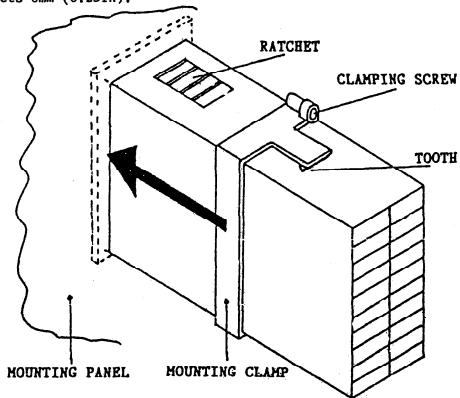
ATTACHMENT OF HOUSING TO MOUNTING PANEL
